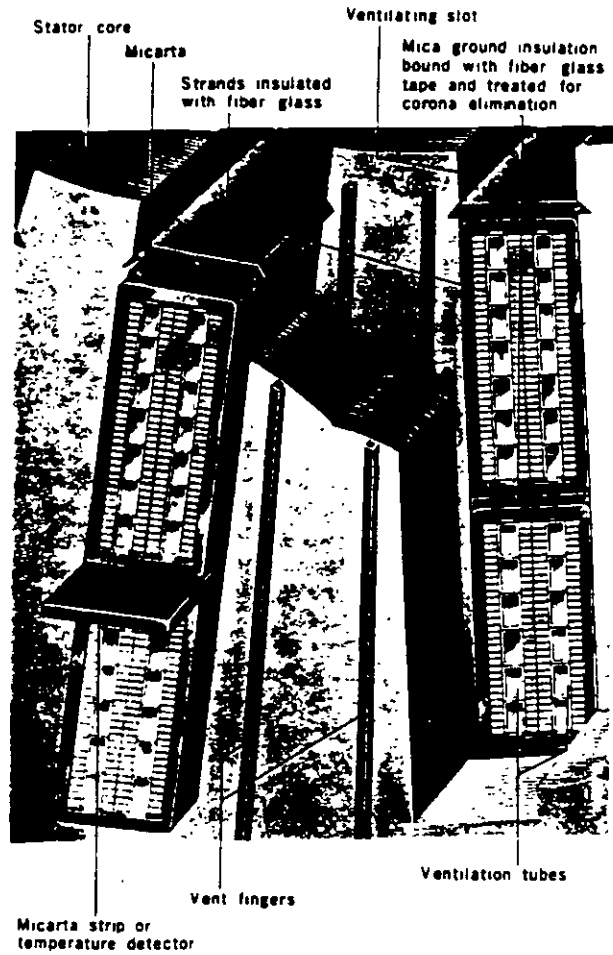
Cross-section of stator coil—inner cooled (double stacks of vent tubes)
